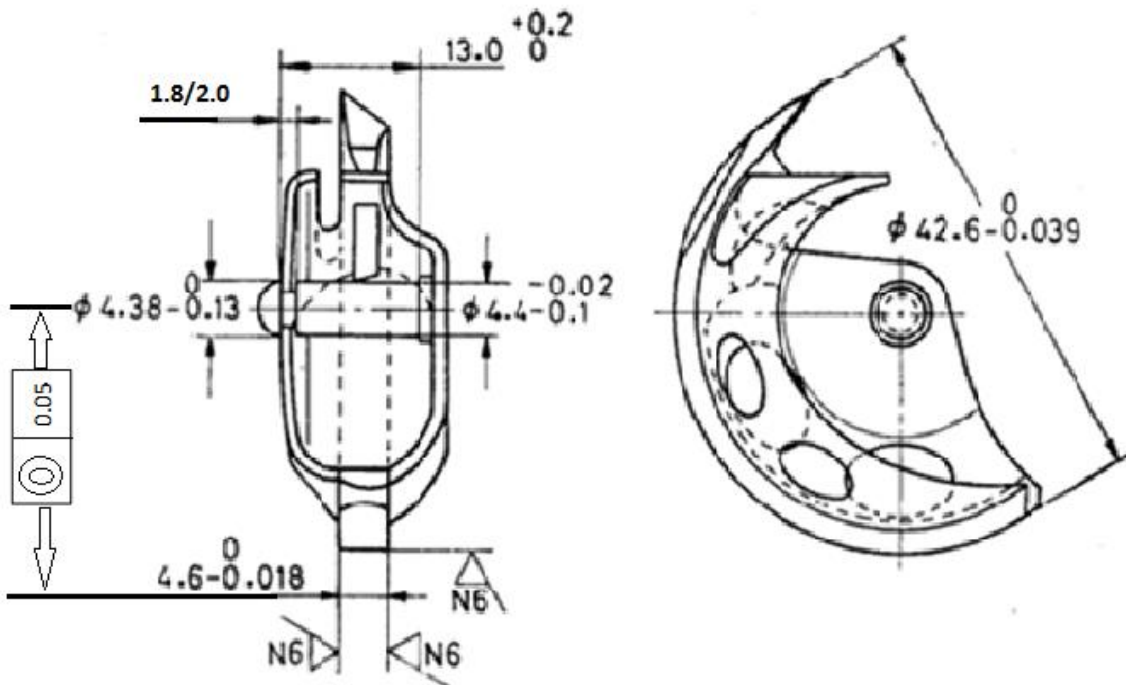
DIMENSIONS FOR VERTICAL OSCILLATING SHUTTLE
